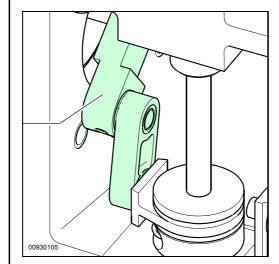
K head, connecting rod bearing, crank - needle bar drive
